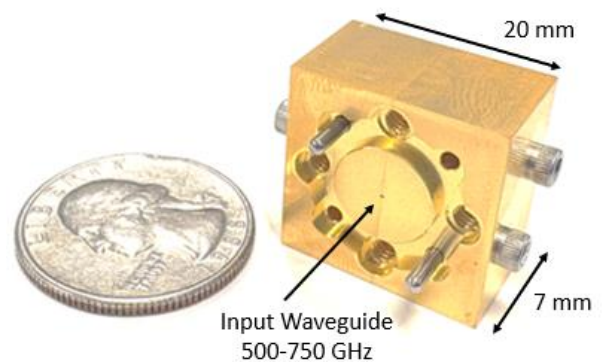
Assembled waveguide structures, including alignment pins, ready for RF testing.
